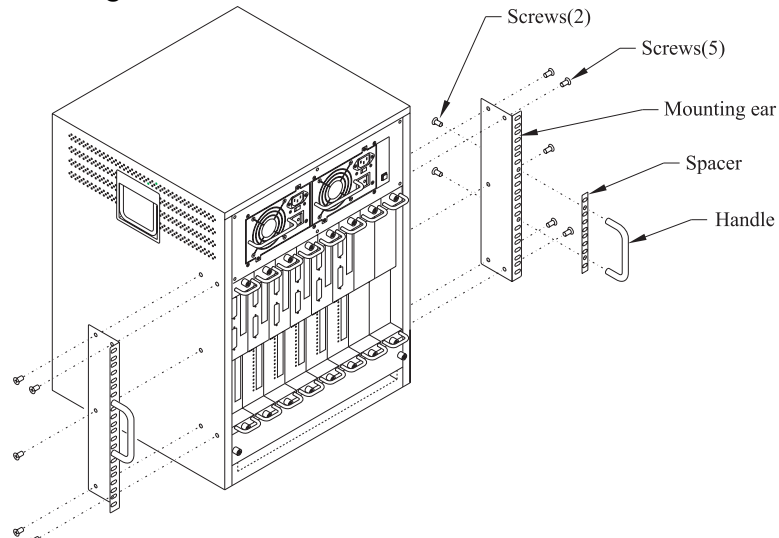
Installing Mounting Ears and Handles for a Standard Equipment Rack
